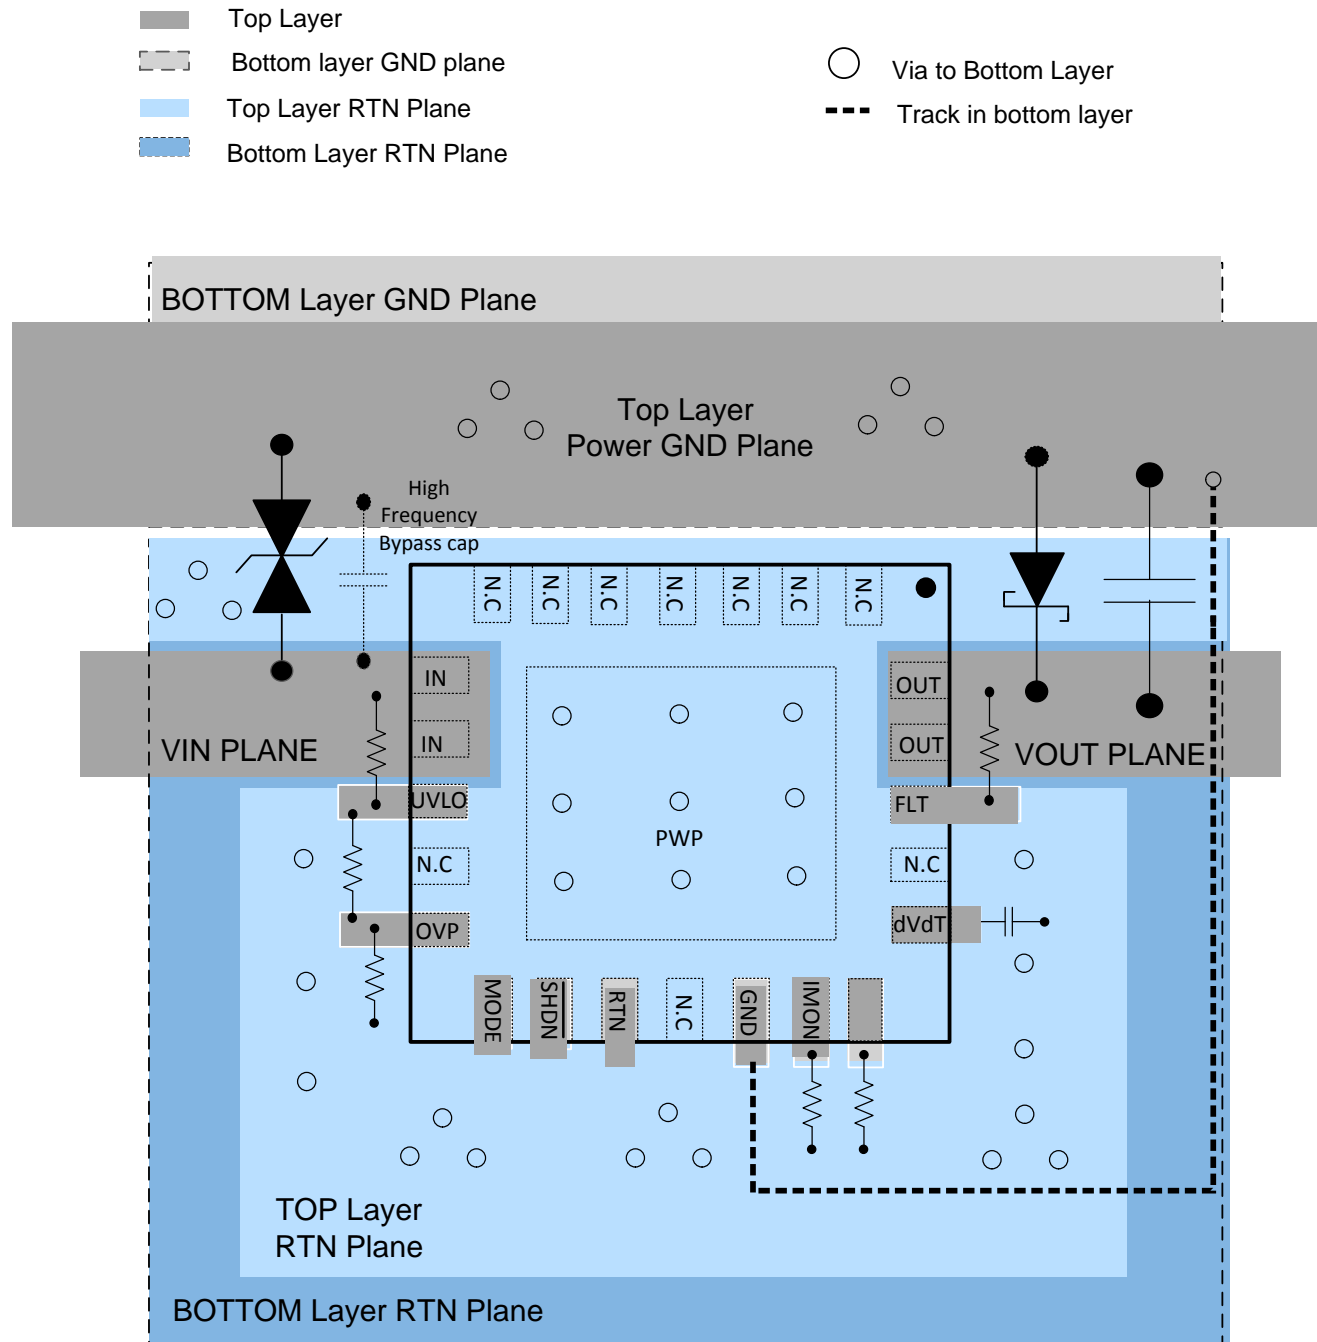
Typical PCB Layout Example with VQFN Package with a 2 Layer PCB
